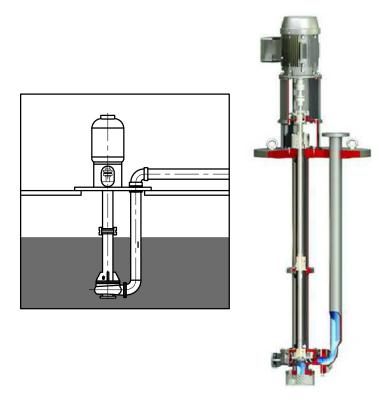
Vertical, sump, single-stage, bearing supported pump. Courtesy of Goulds Pumps Corporation.
